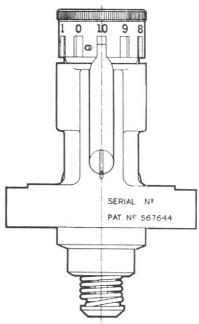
Micro pump assembly. (Pre Mod. 1290)
